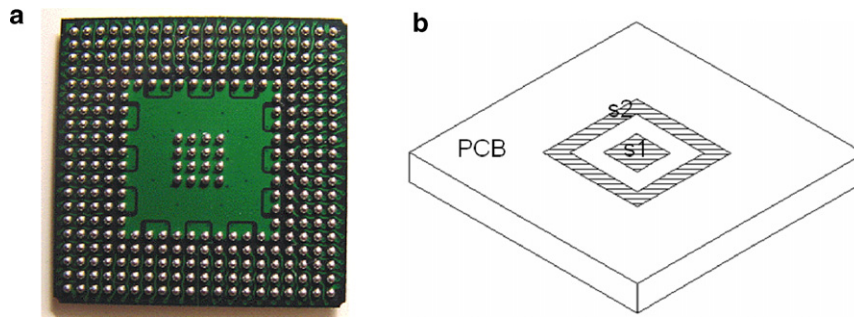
(a) Solder ball array of a typical plastic BGA packaging; and (b) the areas where solder balls located on PCB (s1 and s2).
